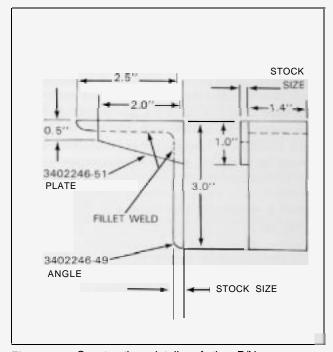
Construction details of the P/N 3402246-47 brace assembly.
